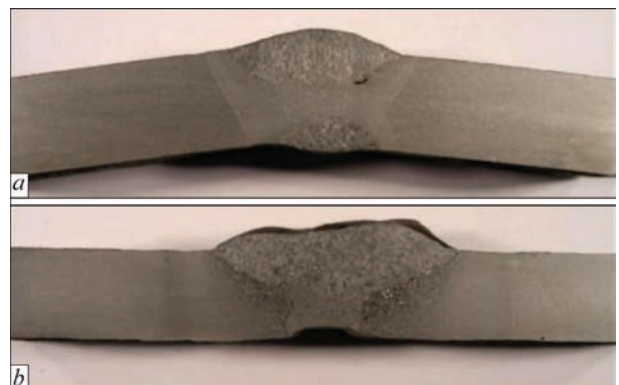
Macrostructure of welded joints: longitudinal (*a*) and circumferential (site) (*b*)
